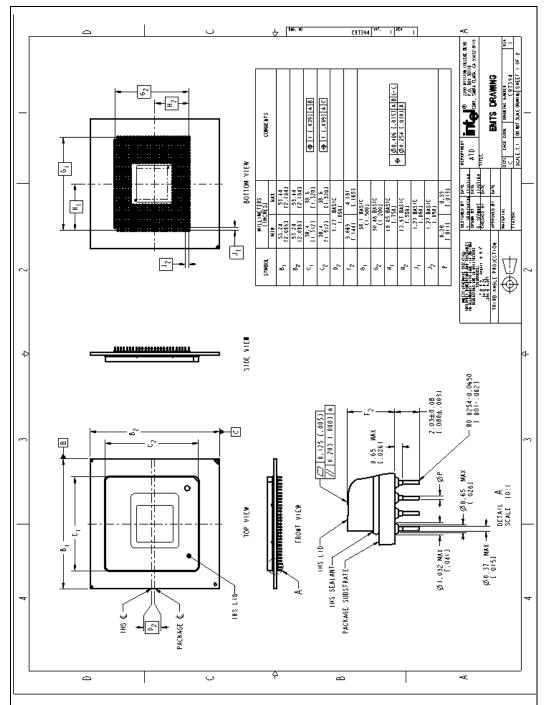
Dual-Core Intel® Xeon® Processor 2.80 GHz Mechanical Drawing
